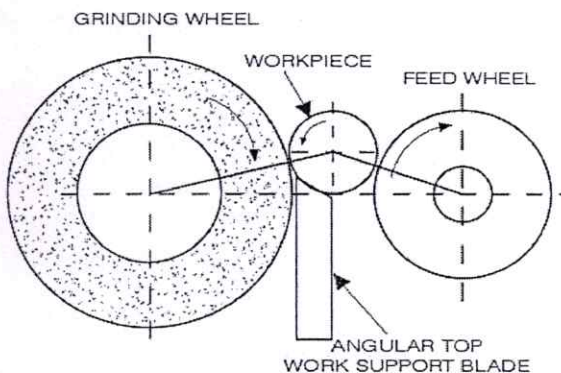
Centerless Cylindrical Grinding Operation [5]
